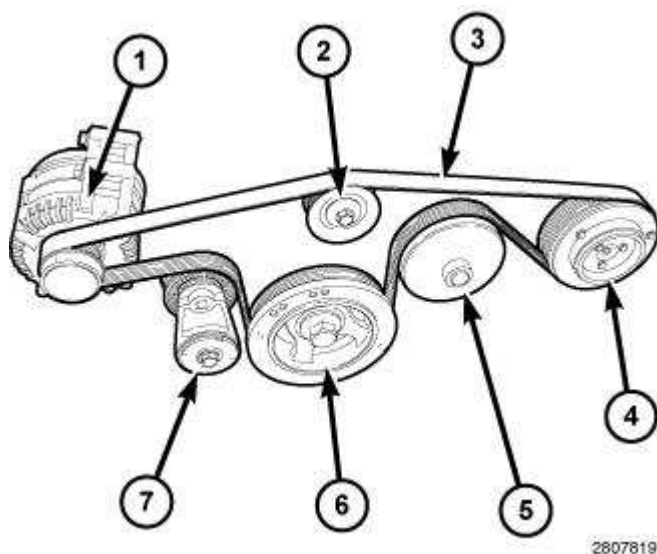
Idler Pulley, Tensioner Arm, Belt, Idler, Tensioner & Belt Routing
